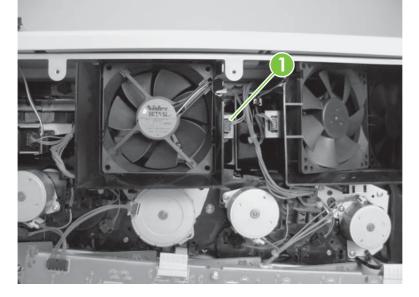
Remove the print-cartridge feed motor (yellow, magenta, and cyan)
